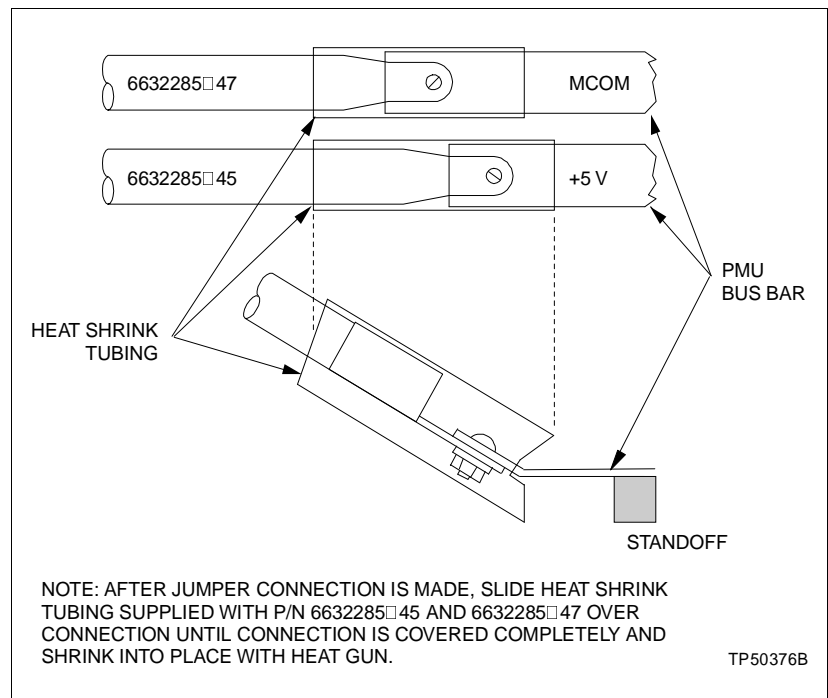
Heat Shrink Tubing for 5 VDC Connection
